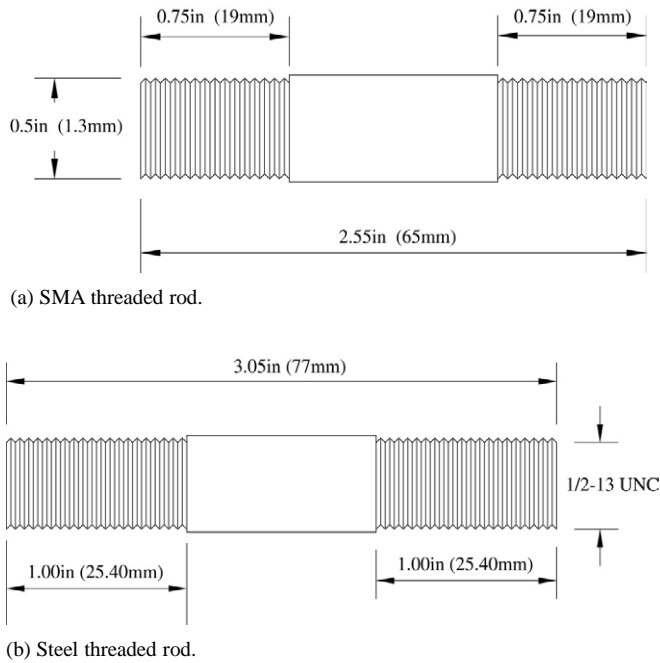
Diagram and dimensions of SMA and steel threaded rods.
